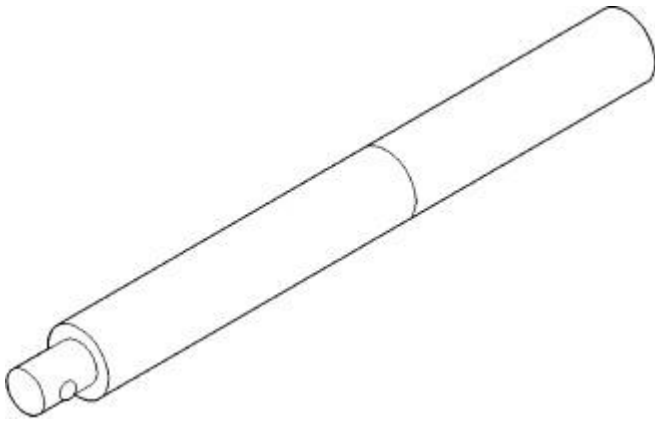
DRIVER HANDLE, UNIVERSAL - C-4171
